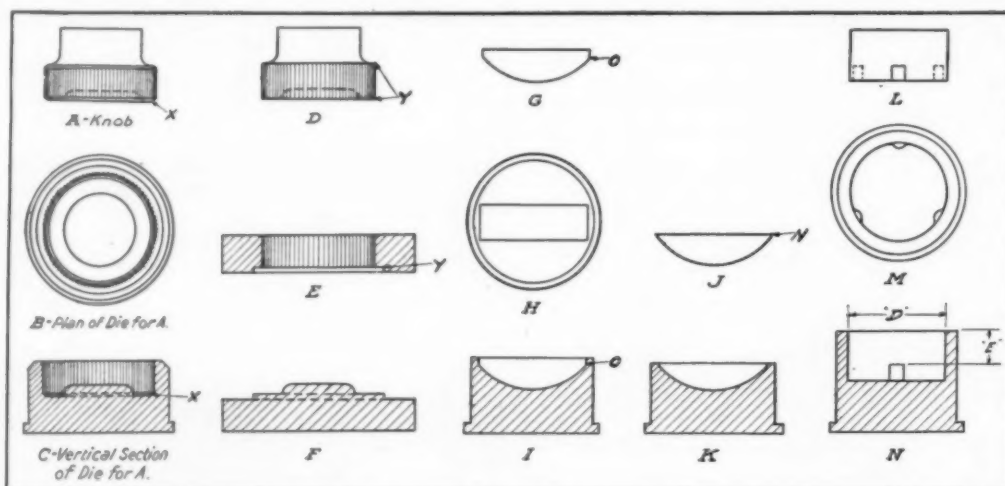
Machining Methods of Making Unchamfered Knob Dies
